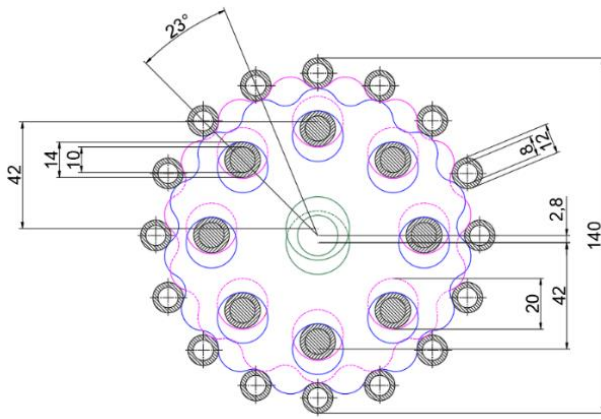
Dimensions of the cycloidal gearbox analysed using MSC Adams and the model programmed in Fortran
